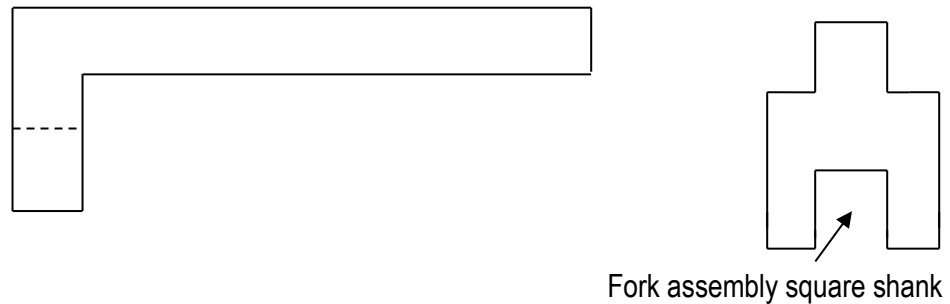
Side and front view of a DFH₂ fork assembly.
